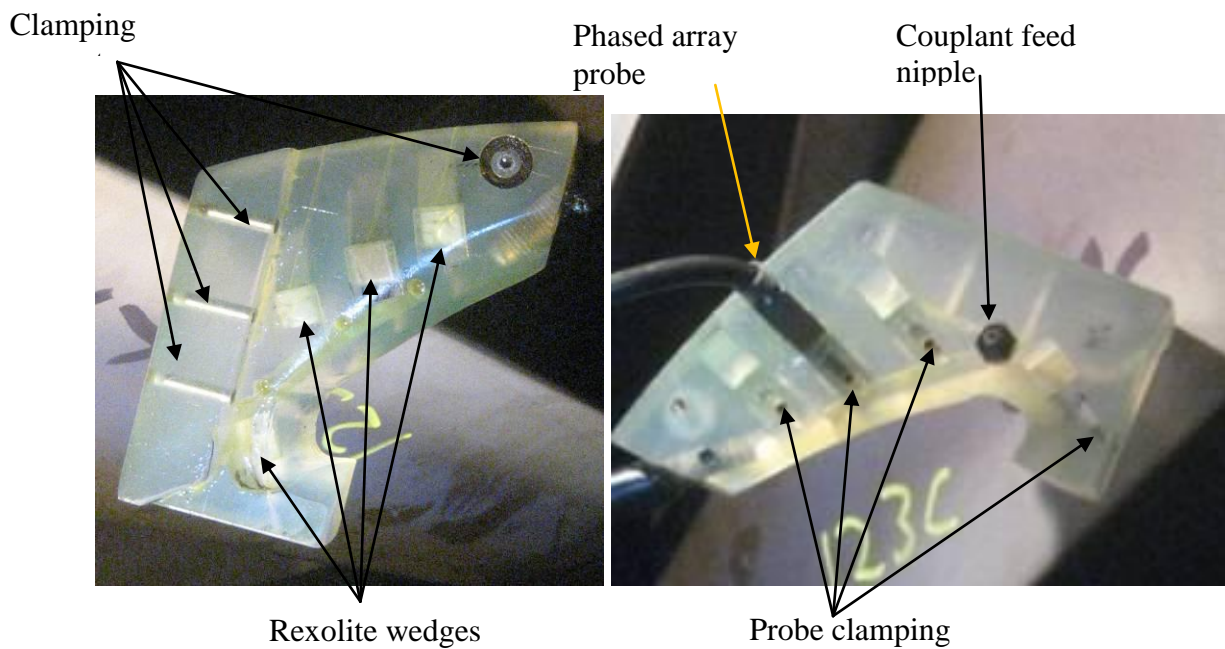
Final inspection jig complete with magnets, couplant feed, Rexolite wedges, phased array probe with clamping screws (for dimensions see Figure 4-40)
